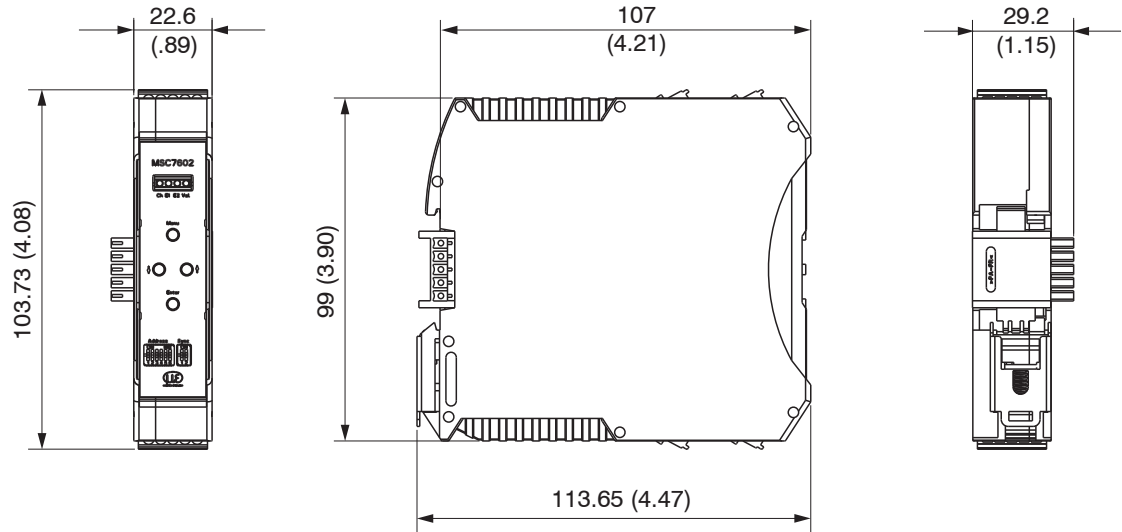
Dimensions of MSC7602 controller model, dimensions in mm (inches), not to scale
